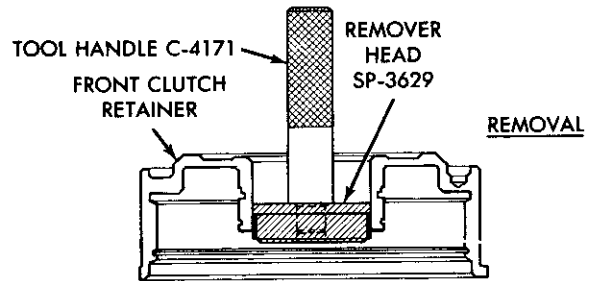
Replacing Front Clutch Retainer Bushing—727
